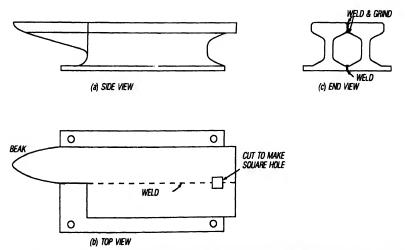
Anvil made from two pieces of flat-bottom railway line about 600 mm long, welded and cut and shaped together.
